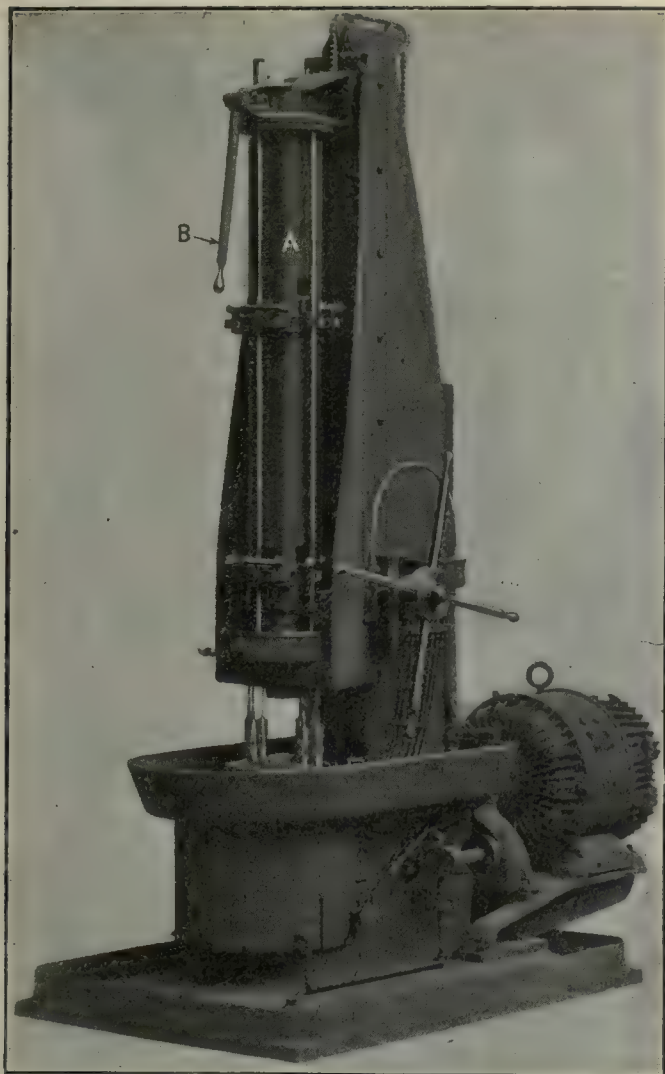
SPECIAL CONSTRUCTION FOR DRILLING STEERING RODS
